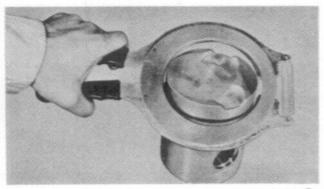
Pistons and connecting rods; disassembly and reassembly (sheet 1 of 2).
